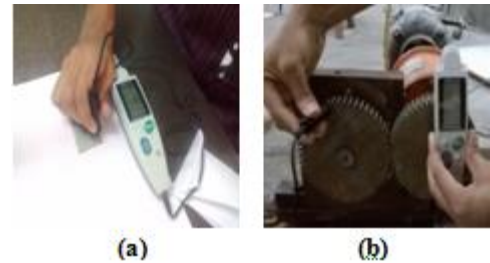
Coating thickness measurement using Electro Physik gauge (a) On sample plate (b) On gears
